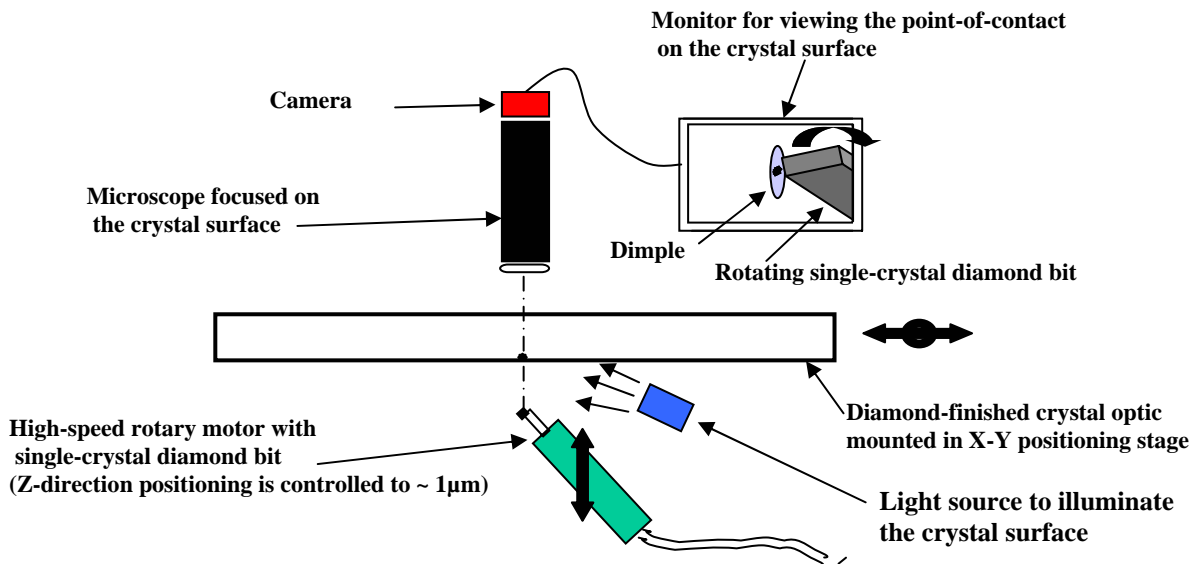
Schematic of the set-up for micro-machining damage sites on crystal surfaces.
